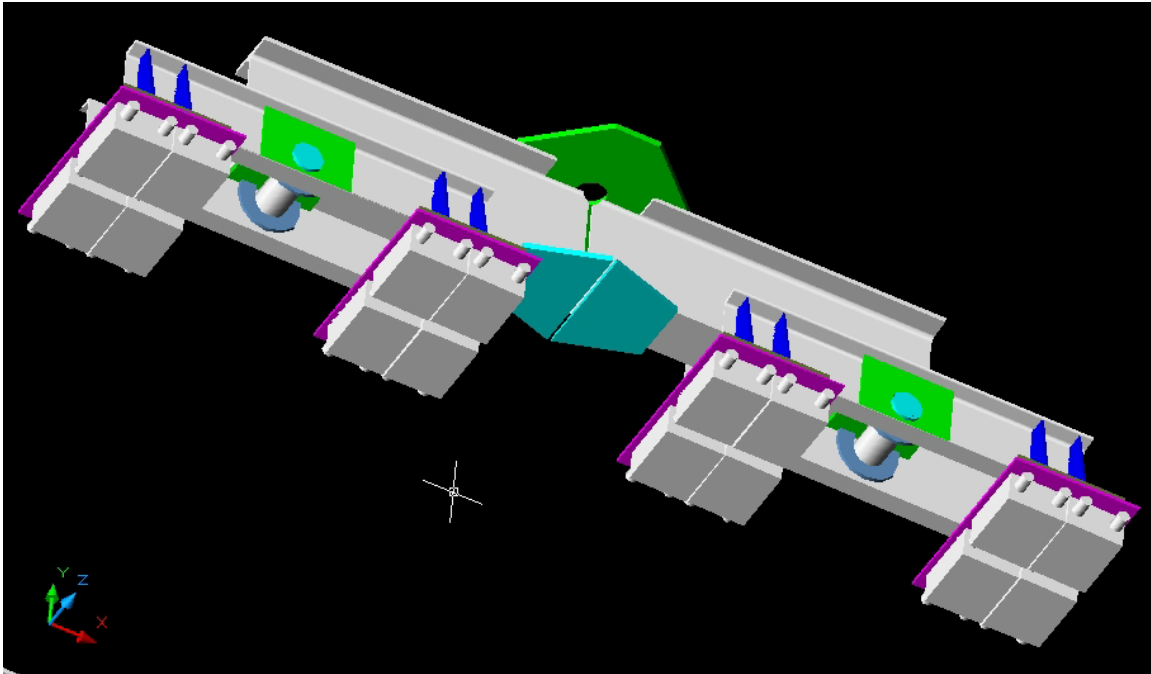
Drawing of half of one whiffle assembly (left or right side), showing the rectangular contact pads that contact the bridge surface during test.
